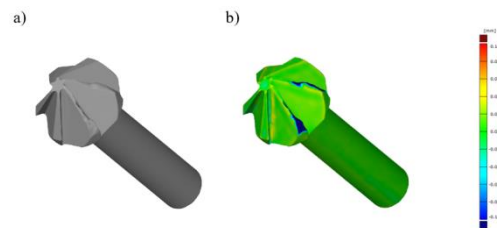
Chamfering tool: a) chamfering tool - mesh, b) map of deviations between the chamfering tool mesh and the CAD model
